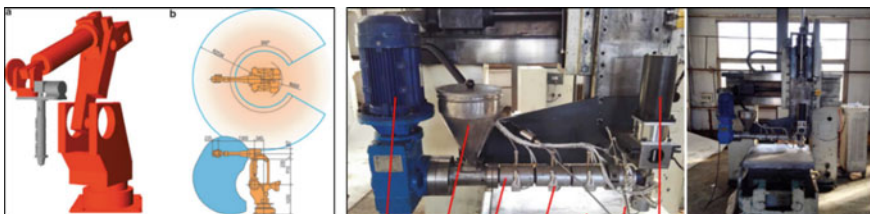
a Big size robotic arm. b Double-stage-screw extruder
